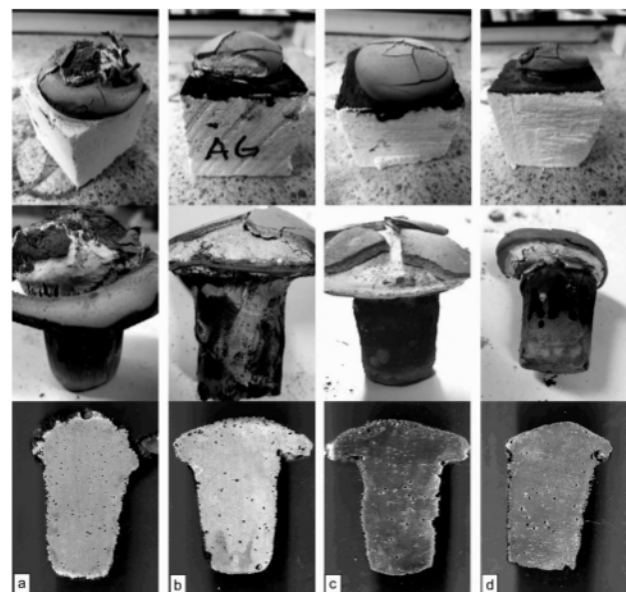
Calcium silicate moulds with castings and casting cross-sections: a) without coating, b) AG coating, c) AZG coating and d) AAGF coating
